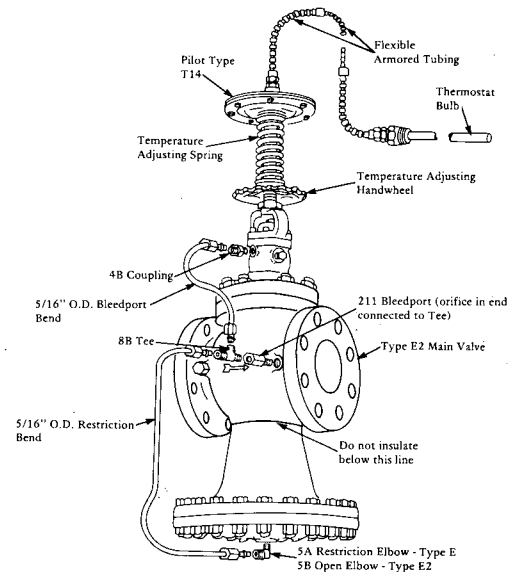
Regulator assembly for Type ET14 or E2T14 with integrally mounted pilot
